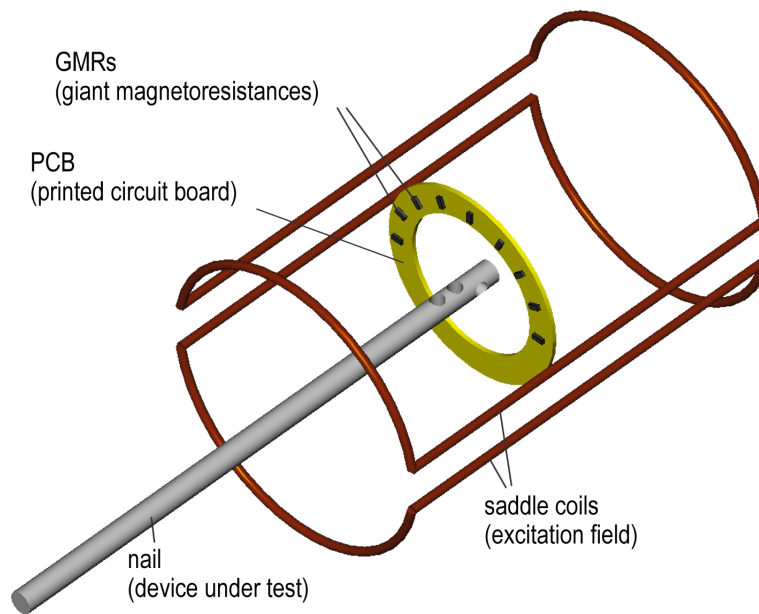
Schematic model of the measurement configuration in [5]. The GMR sensors are mounted on a ring-shaped printed circuit board (PCB).
